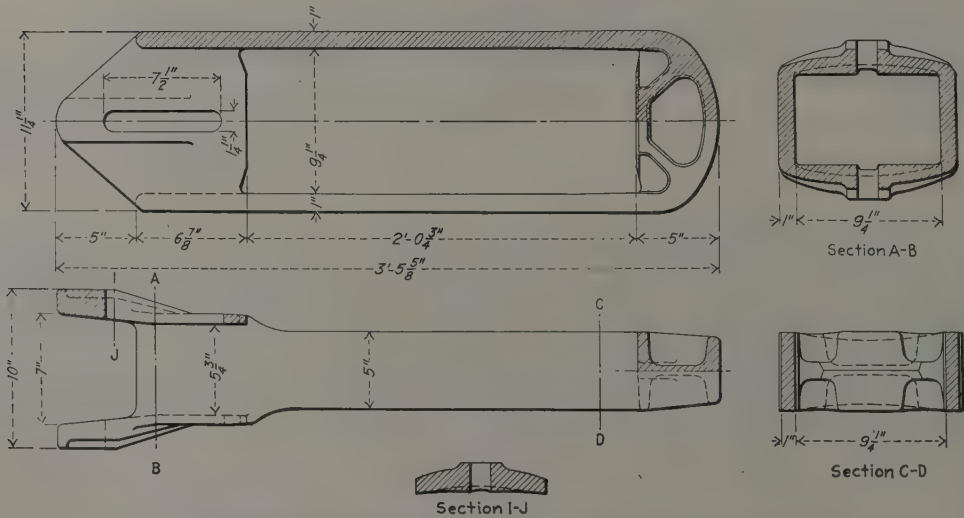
Buckeye Yoke for Friction Gear. Buckeye Steel Castings Company.
